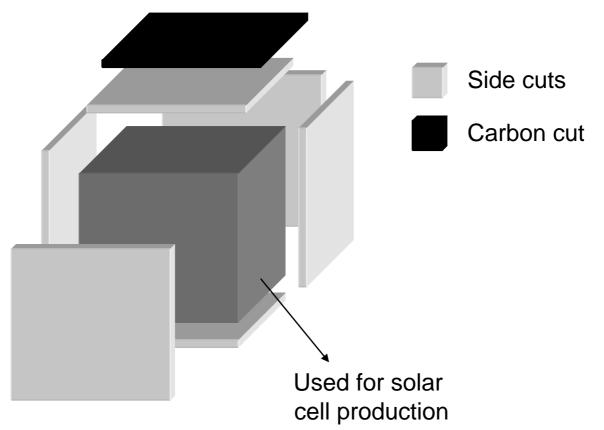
After directional solidification, carbon cut and side cuts are removed from the ingot. Only the middle part is used for solar cell processing.
